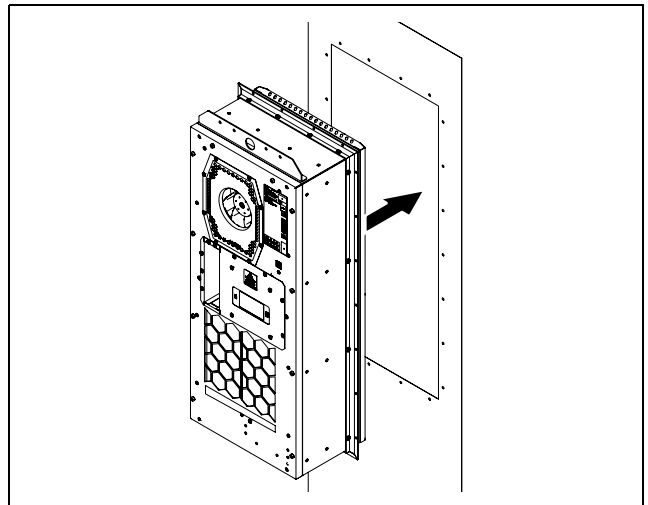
Inserting the cooling unit into a single-walled enclosure panel
